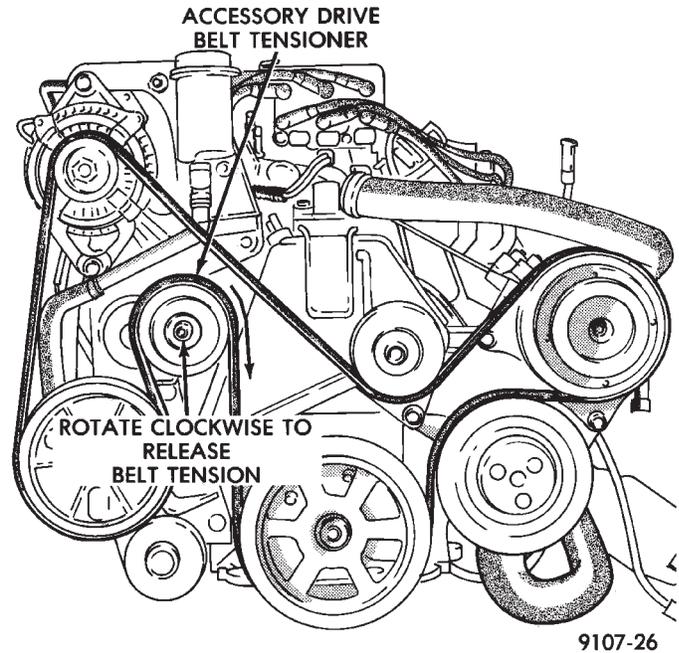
Accessory Drive Belt—3.3/3.8L Engines
